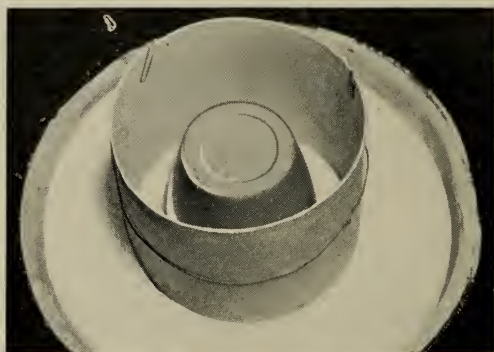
A pattern and form imbedded in sand or clay ready for casting the first half of a plaster mold (Type 2, Fig. 53).
